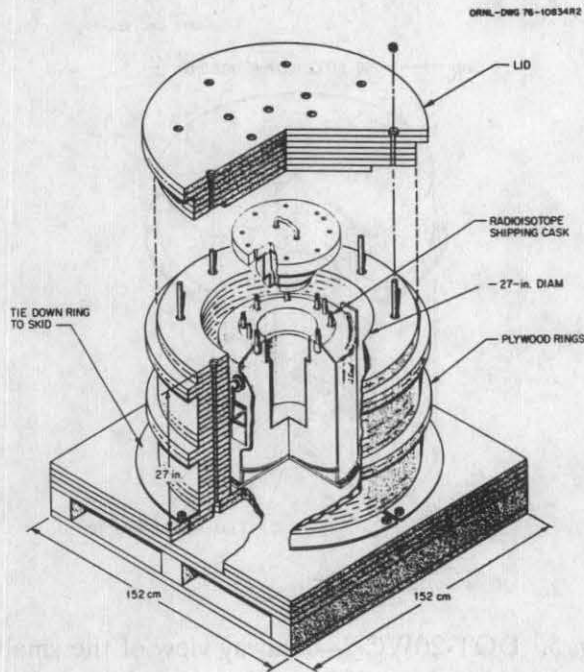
DOT-20WC-5—special form package; weight = 4000 lb.
